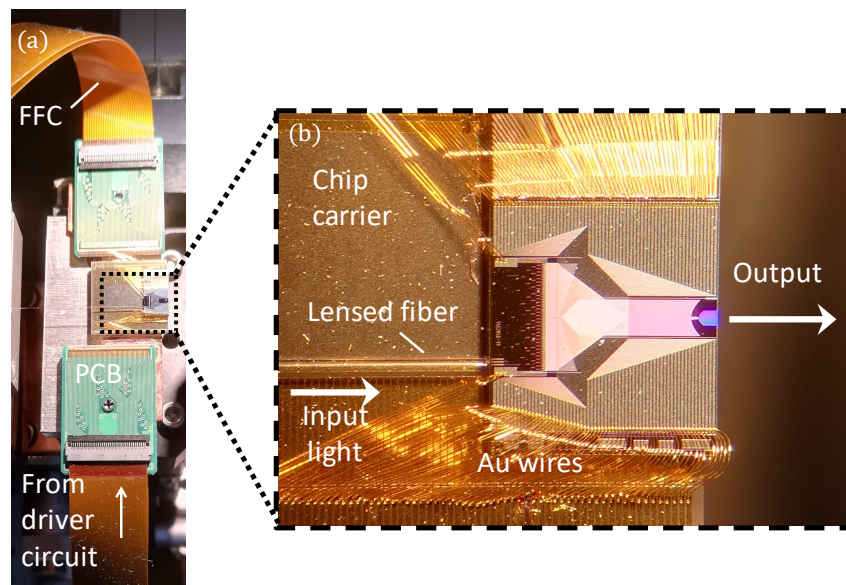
Images of (a) the fabricated device mounted on chip carrier with FFC and (b) magnified OPA after wire-bonding.
